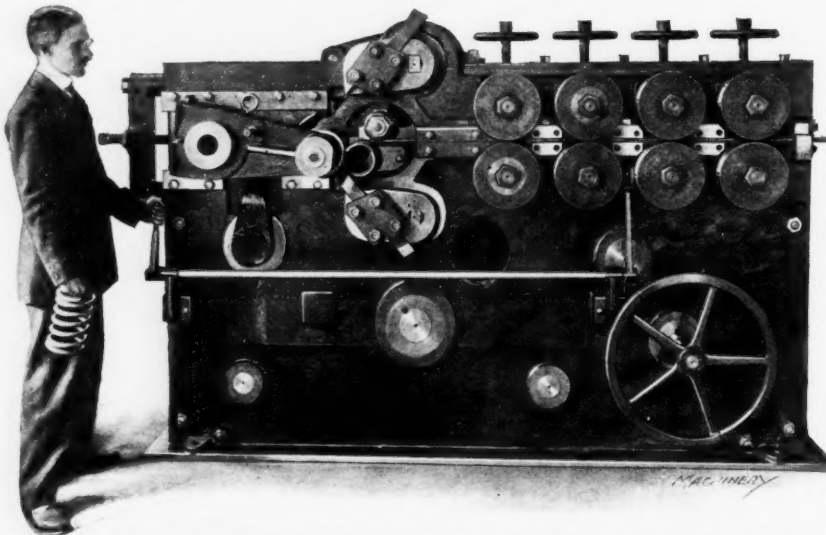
Sleeper & Hartley No. 5 Universal Spring Coiling Machine for handling Stock up to ⅝ Inch Square—believed to be Largest Spring Coiler ever built
